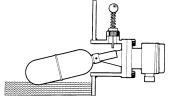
Test Devices for Mobrey 'A' Flanged Switches
